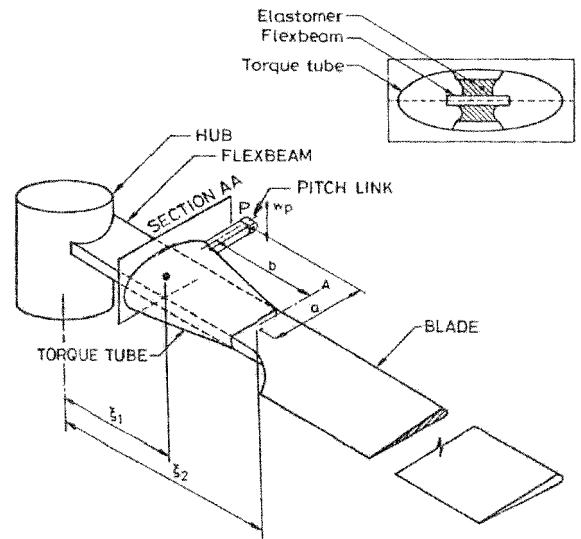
Bearingless rotor blade with pitch link at the leading edge.
